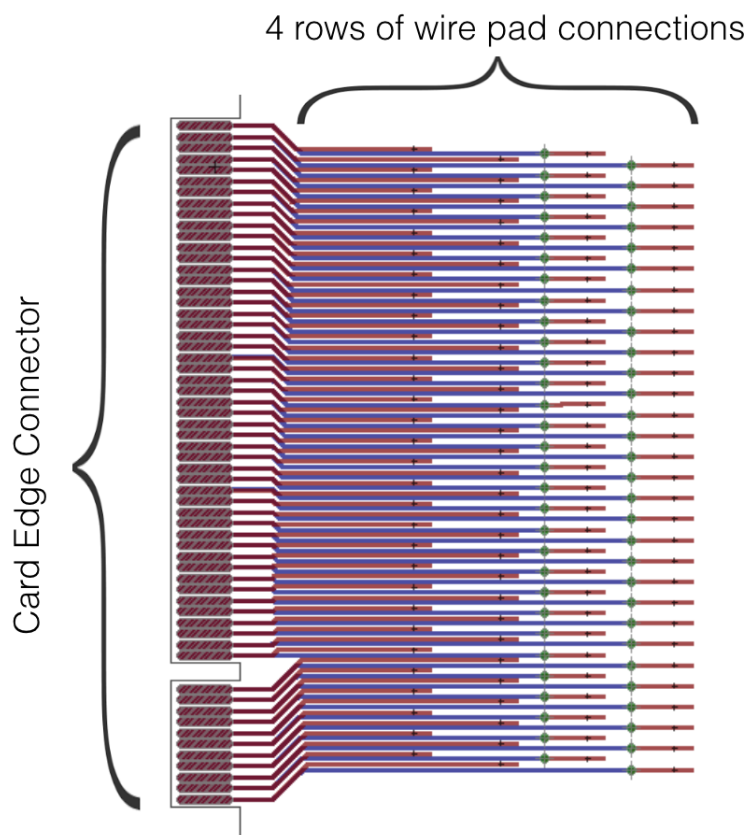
A design schematic, created using EAGLE, showing the wire connection pads (denoted by the black crosses) and card edge connector of the ThGEM-MWPC PCB.
